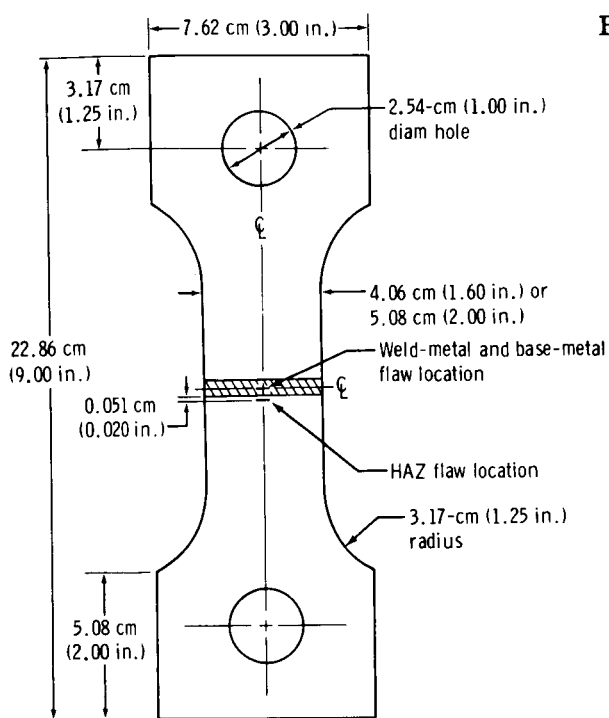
Inconel 718 cross-weld and base-metal specimen configuration for ALSA bottle material tests.
